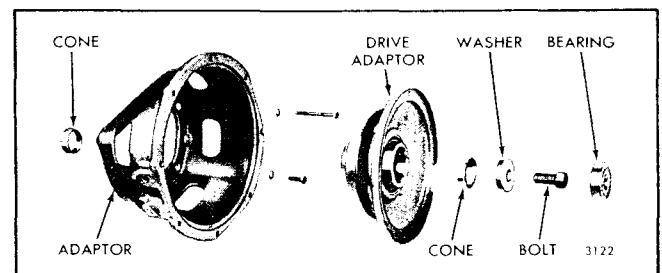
Front Power Take-Off Adaptor and Drive Details and Relative Location of Parts
